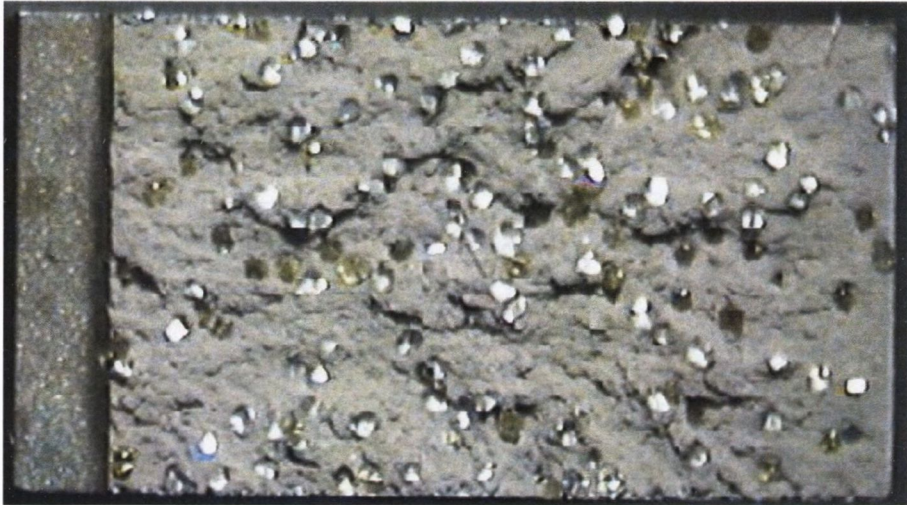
FastTrack Fracture Toughness specimen which failed to grow a fatigue crack but subsequently fracture toughness tested. The fast fracture surface of the 60/70 DC25 specimen shows diamonds present along the fracture surface. Run 78/1, mag. x 10.
